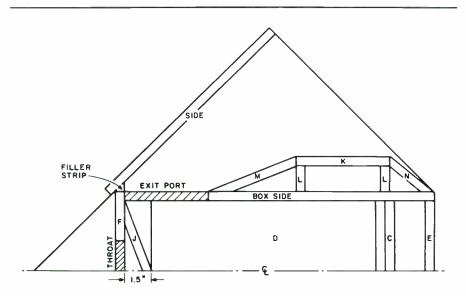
This top view of one half of the box module shows the location of the outer flare pieces.
